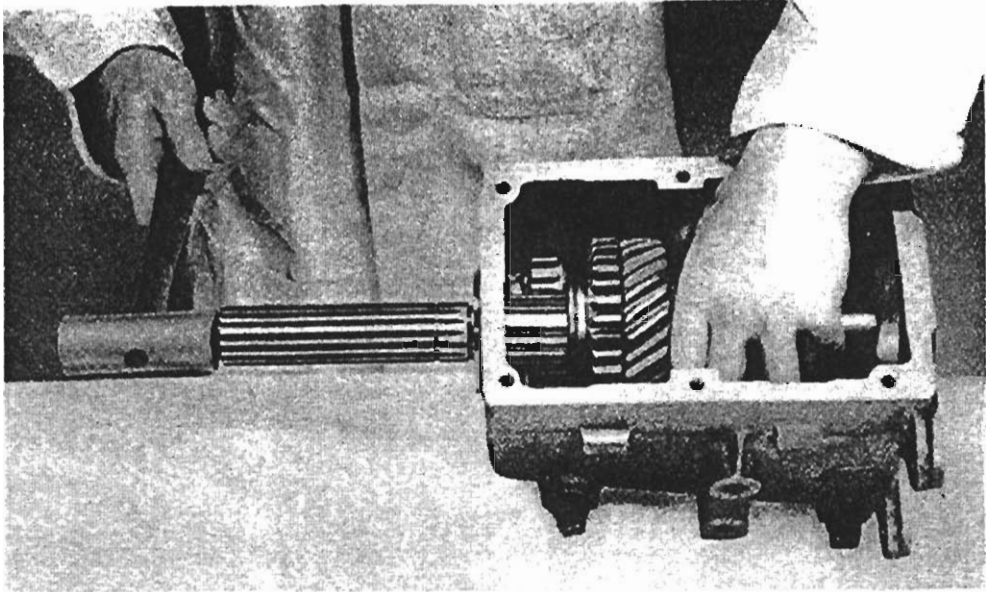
Tap the Rear End of the Driving Shaft with a Soft Hammer.
